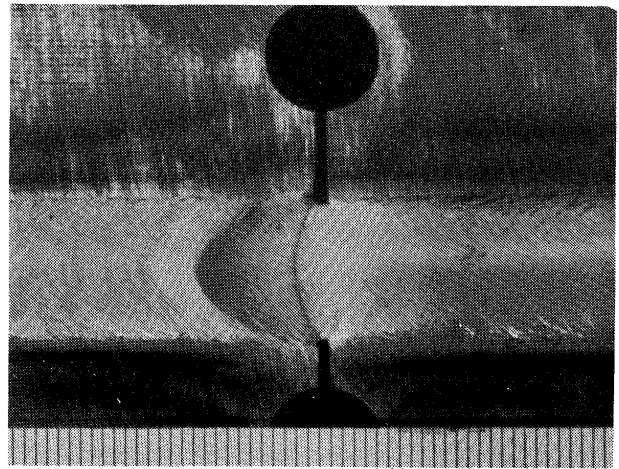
General appearance of weld cold crack in TGRC test
